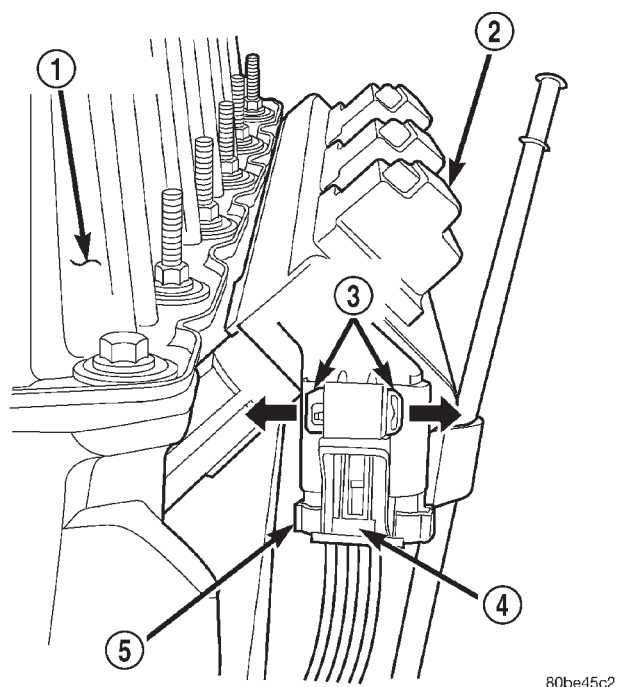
Ignition Coil Electrical Connector—4.0L 6-Cylinder Engine
